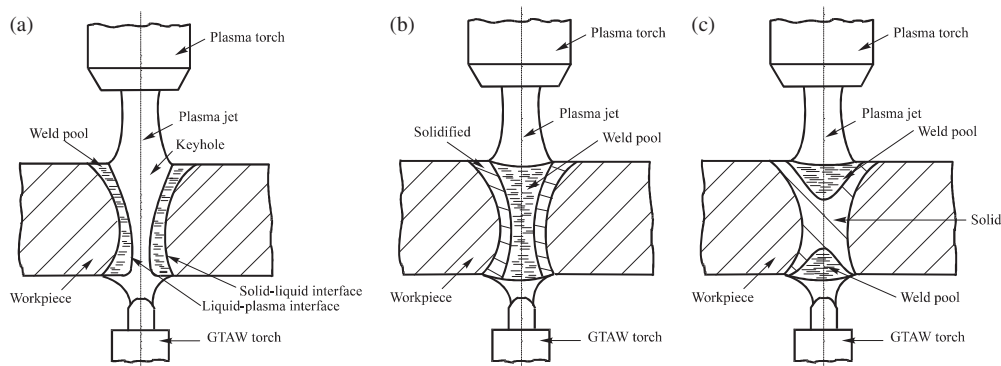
Weld pool transition after current decrease. (a) Transient state 1—keyhole; (b) transient state 2—complete weld pools; (c) incomplete weld pools.
